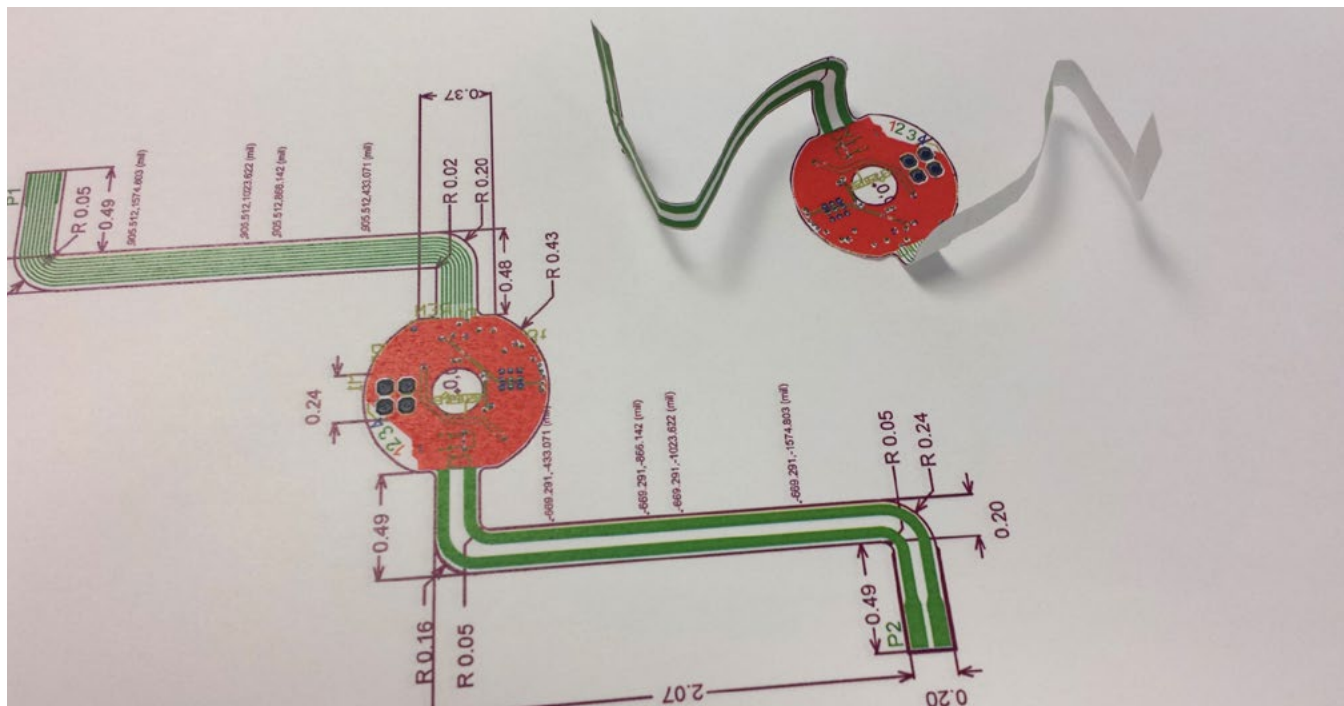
A paper doll of the rigid-flex design of a stepper motor controller to be mounted in a movable part of the mechanical assembly.
